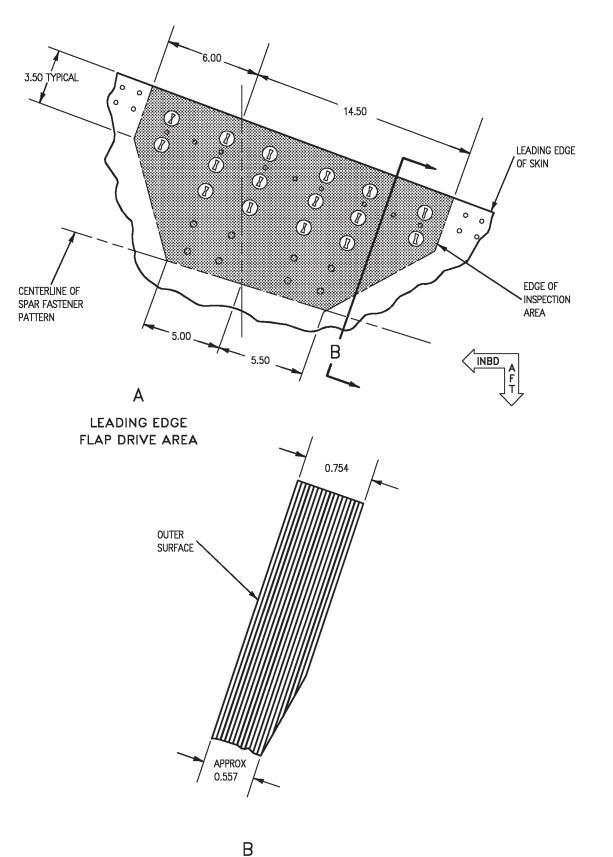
Inner Wing Lower Surface Solid Composite Laminate and Door Sill Inspection Areas (Sheet 2)
